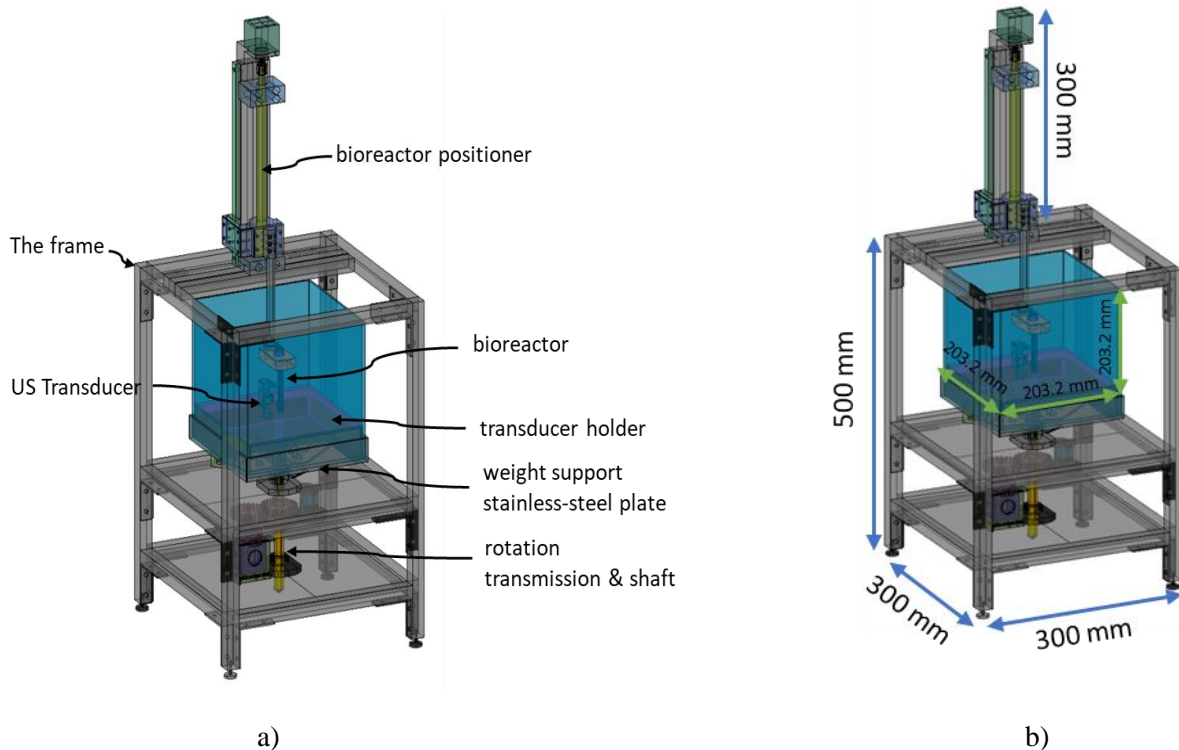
a) The 3D design concept of the USCT imaging device, b) the dimension of the frame and the dimensions of the water container.
